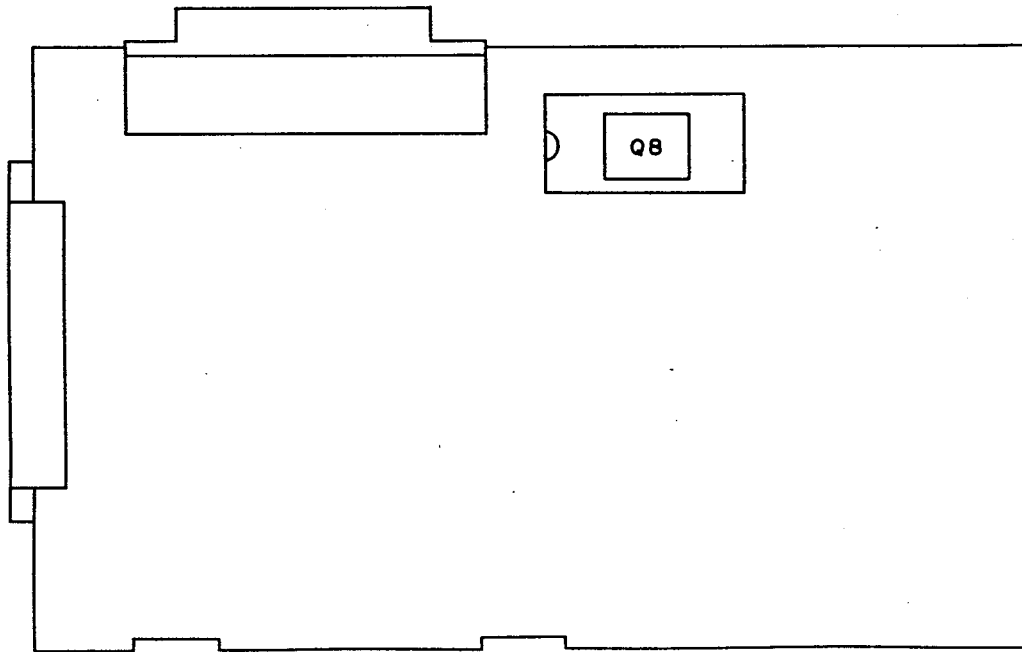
CMDR Printed-Circuit Board (4YA4042-1056) 2/2
